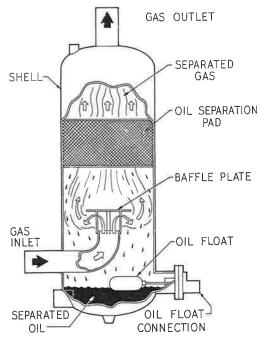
CUT-AWAY VIEW, OIL SEPARATOR
